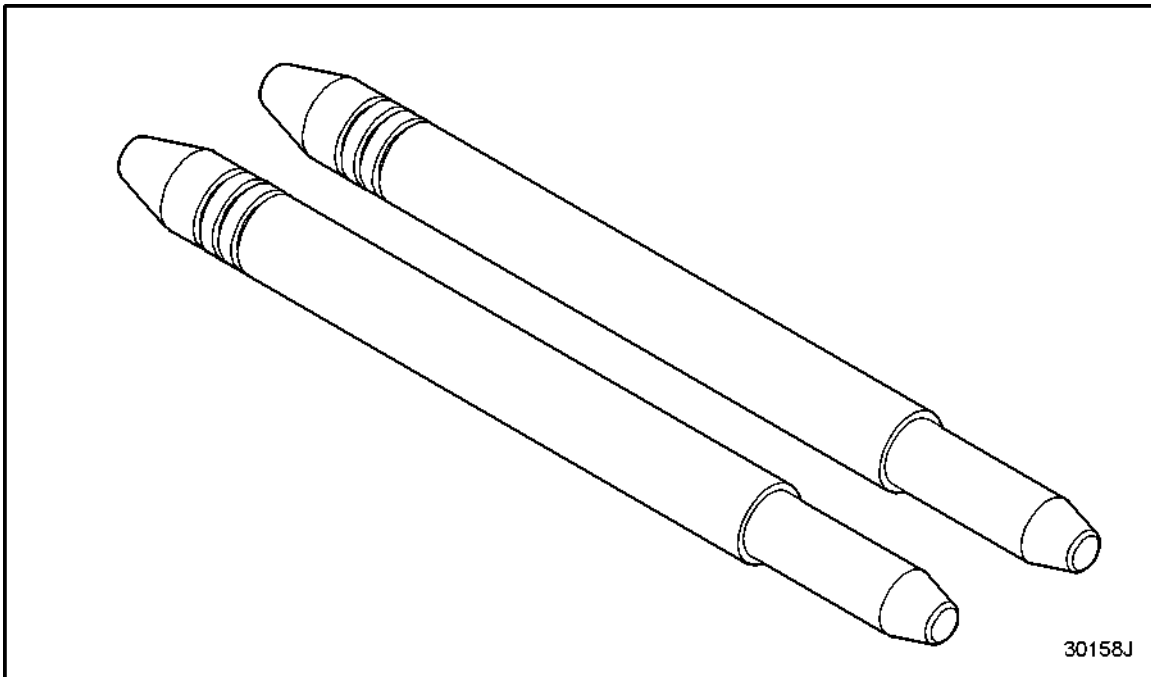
Cylinder Head Guide Studs,J 9665
